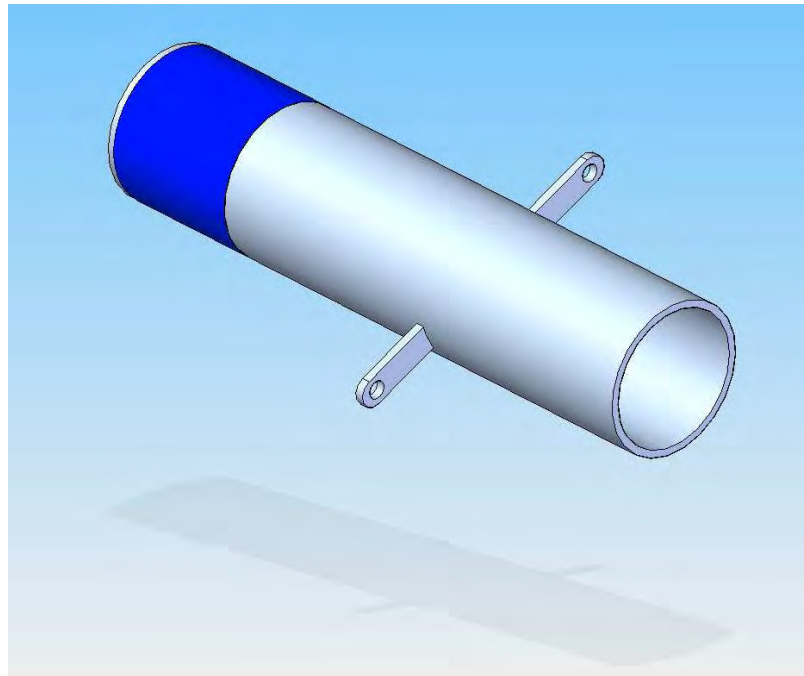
Part of twist lock mechanism. Turning tube with flexible rubber part.
